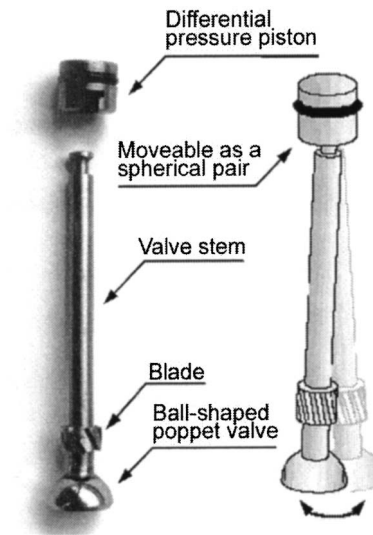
The poppet valve face with a shape of ball in the high-pressure hydrogen injector
